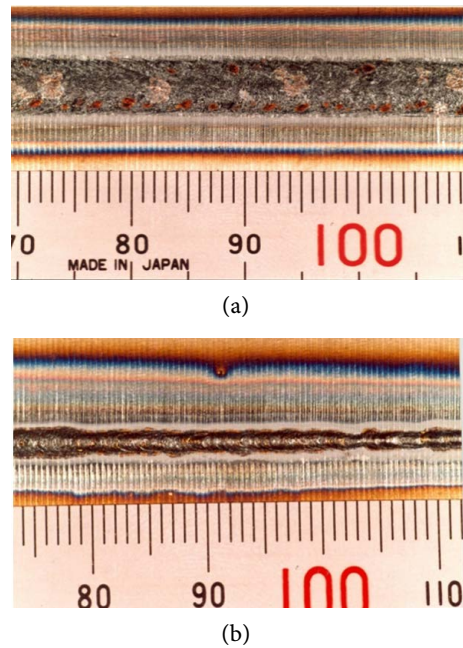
Butt welds of 7.0 mm thick plates of JIS G3106 SM570 produced by laser power of 5 kW, welding speed of 0.5 m/min, shielding gas flow rate of 30 L/min and defocusing distance of -0.5 mm (a) face side, (b) root side.
